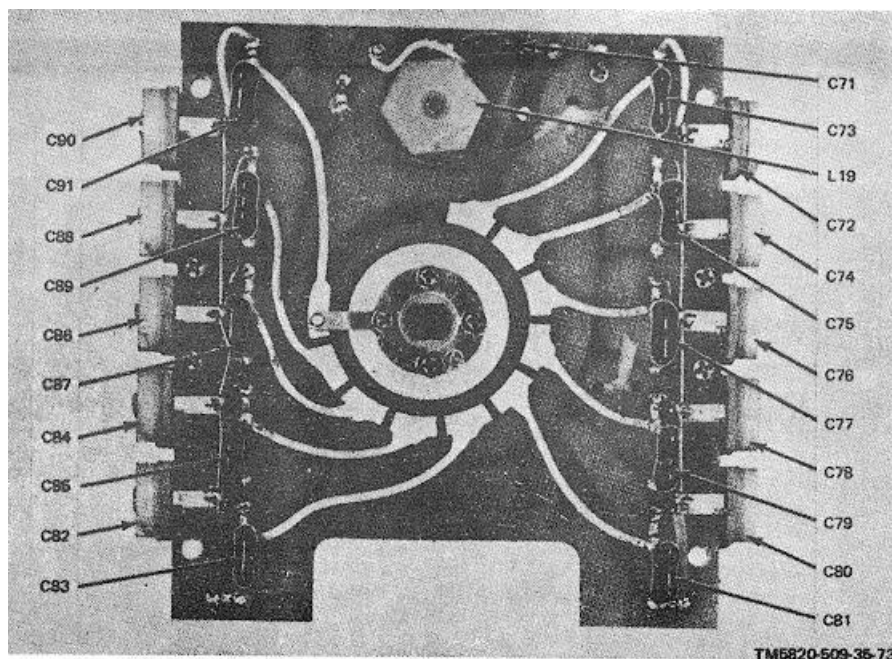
Oscillator Control C-4311/PRC-47 (A8A7), Card Assembly E5.
